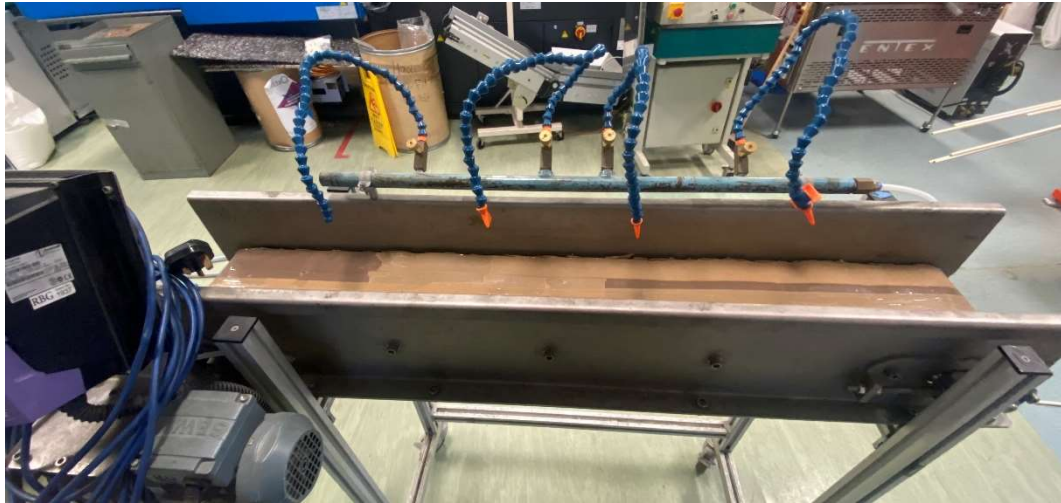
Melt extrusion conveyor device with dry compressed air-cooling line.
